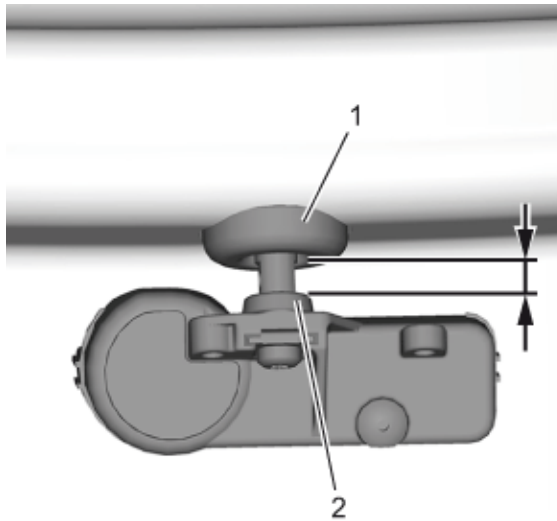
Tire Pressure Transmitter To Valve Stem Gap
